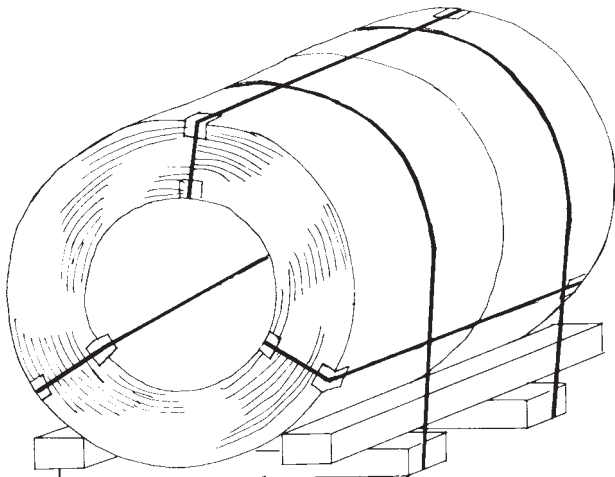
Suitably Packaged Bare Unwrapped Individual Stainless Steel Sheet Coil on Cradle Platform, with the Eye of the Coil Horizontal
